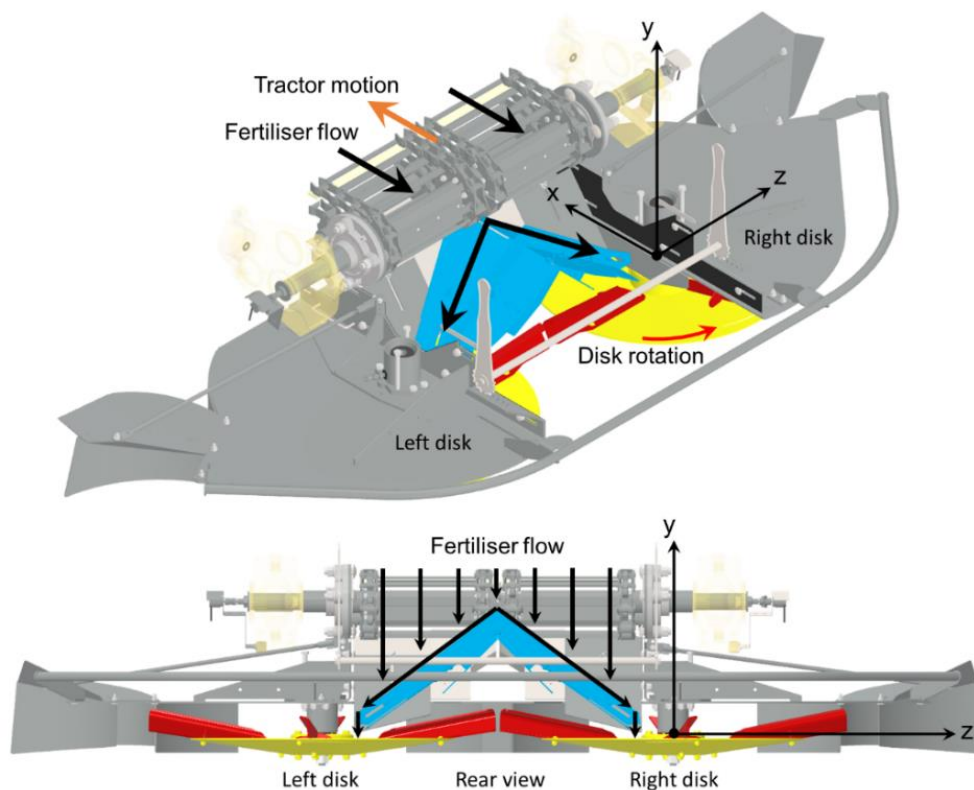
CAD model of an isometric view (top) and rear end view (bottom) of the spreader
